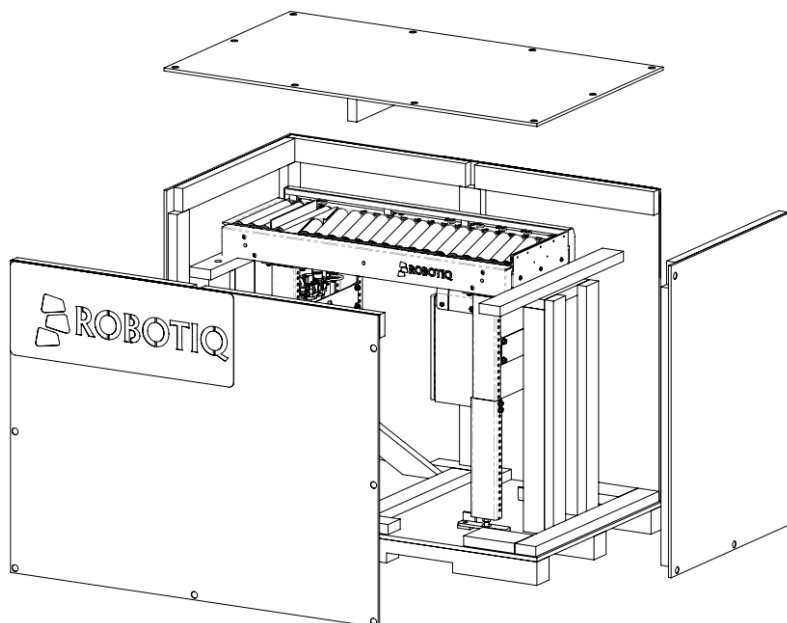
Crate of the Robotiq Smart Infeed 100 - Side Panels Removed
